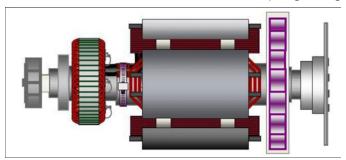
SINGLE BEARING ALTERNATOR ROTOR SHOWING COUPLING DISCS BOLTED TO DRIVE END COUPLING HUB (AT RIGHT)
